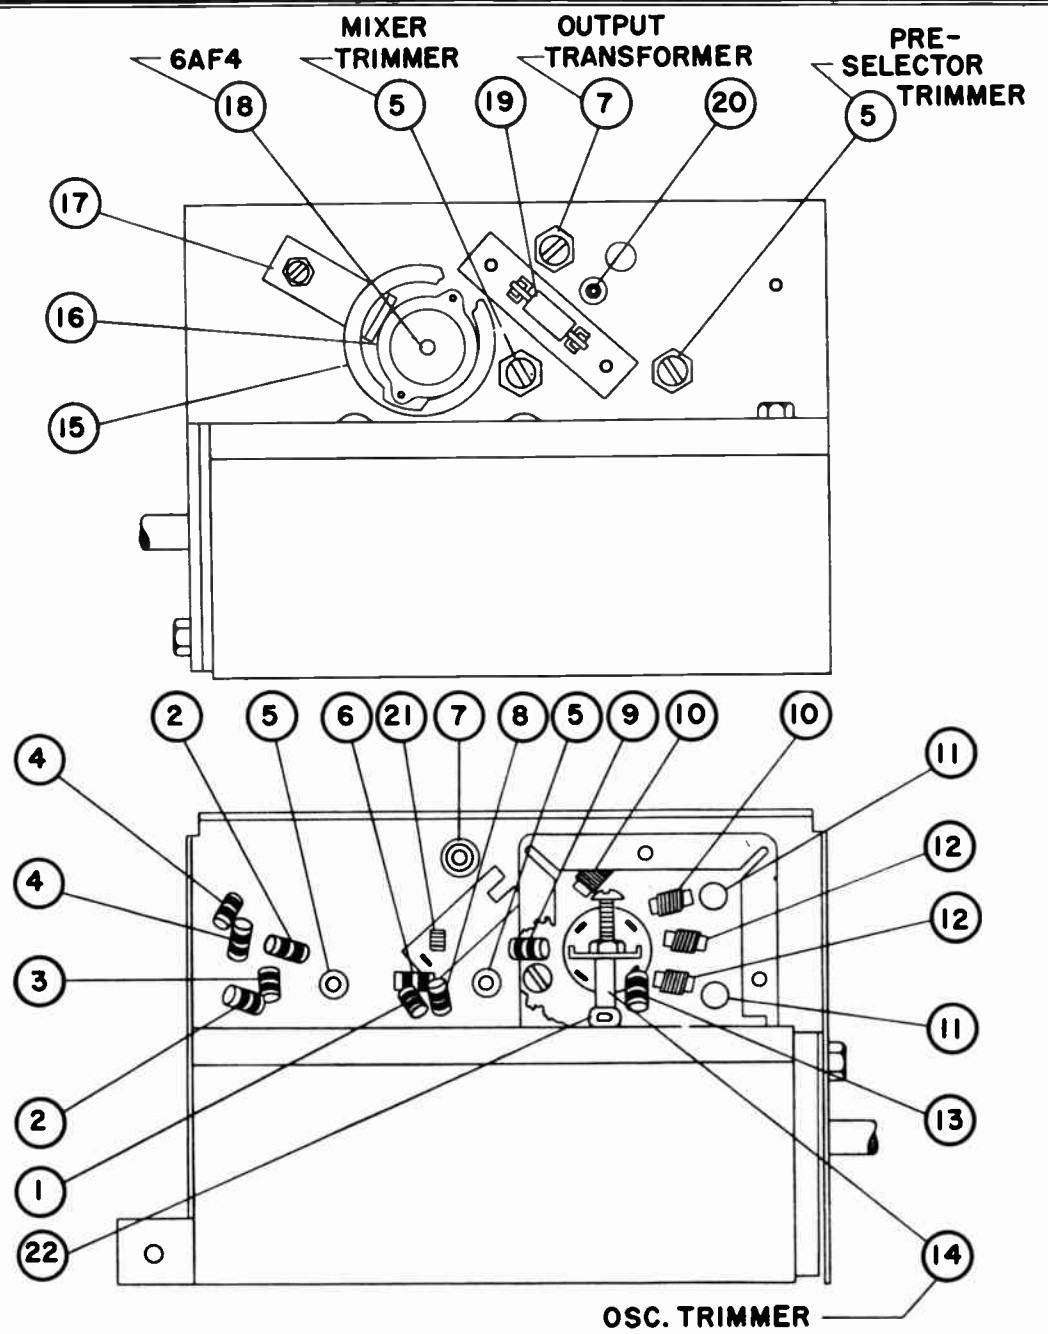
Top and Bottom Views of UHF Converter T95-34 Showing Parts Locations
